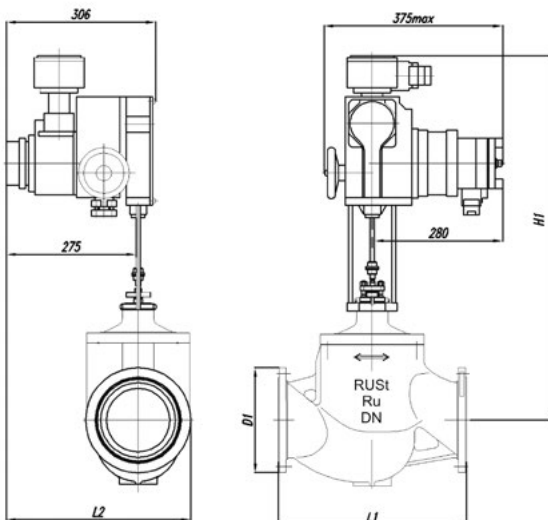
Overall and connection dimensions of 300, 400, 500 series Roost® valves with MEPK electric actuator
